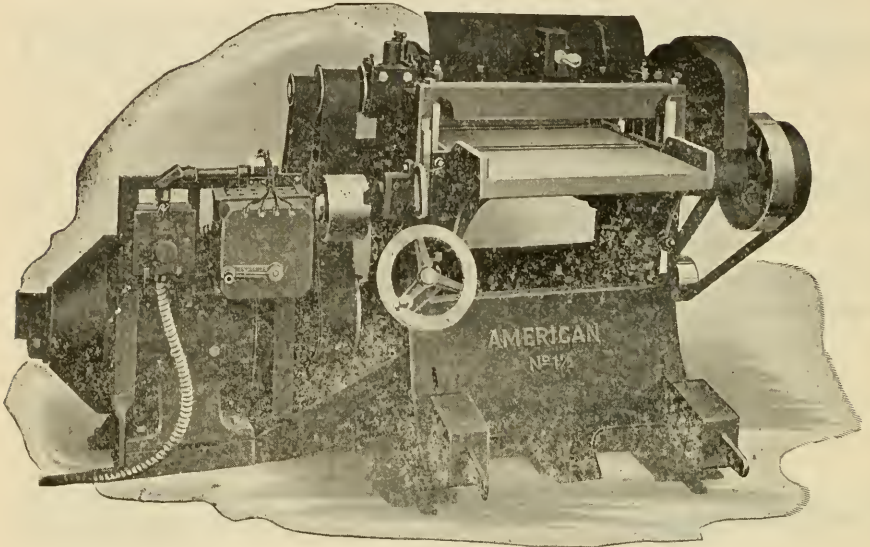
SINGLE SURFACER WITH INDIVIDUAL MOTOR DRIVE
